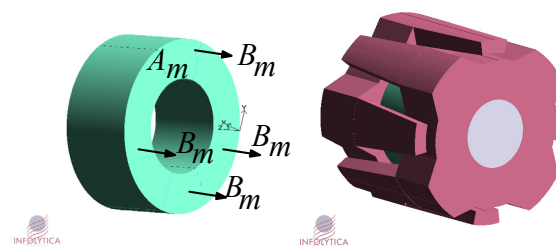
A ring-magnet, magnetized in the axial direction and a rotor core claw-structure
